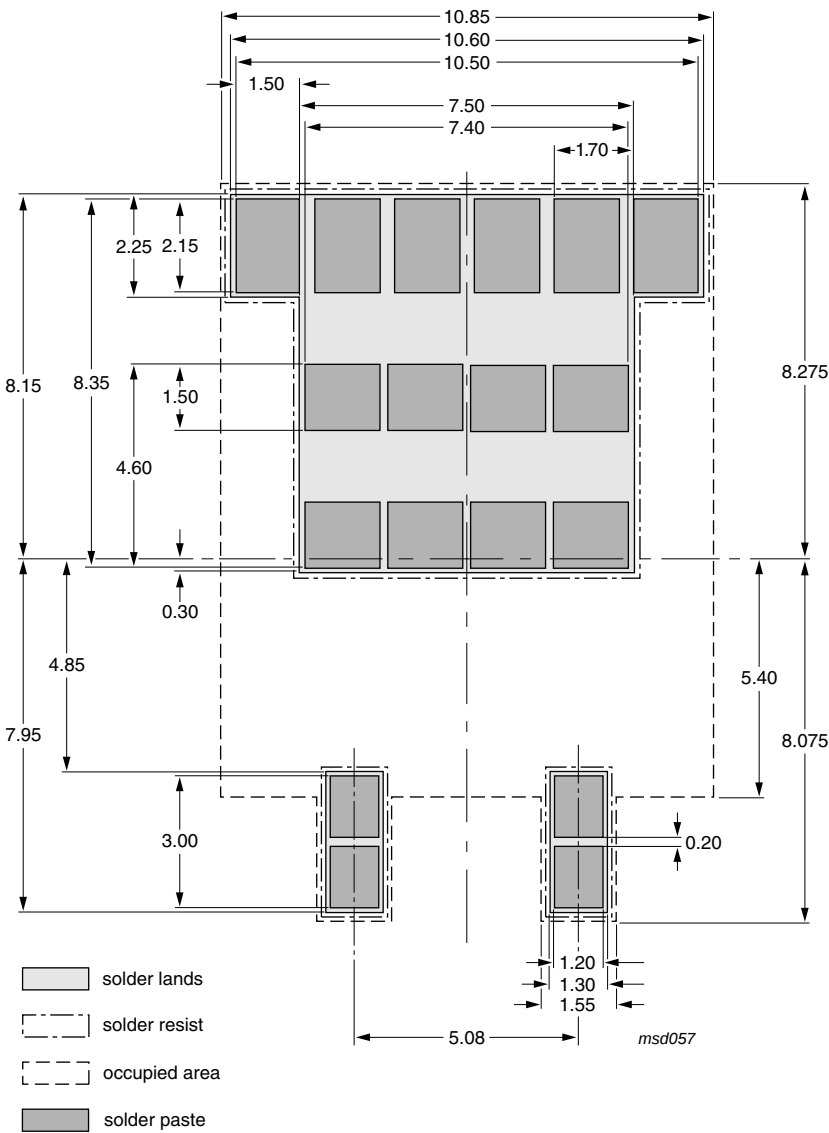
Reflow soldering footprint for SOT404 (D2PAK)
